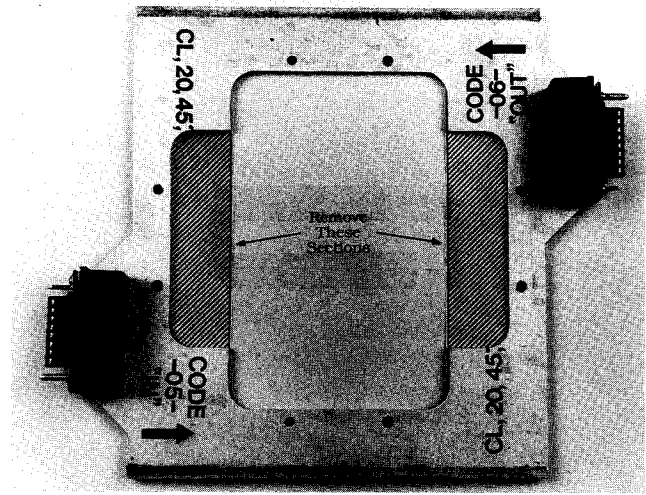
Wedge mounting plate showing additional areas to be removed when reorienting wedges.
